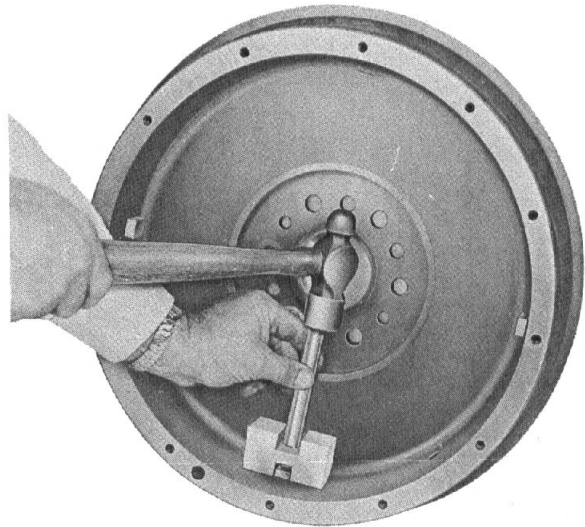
Aligning Drive Pins in Flywheel Using Lipe Tool T-10670A.
